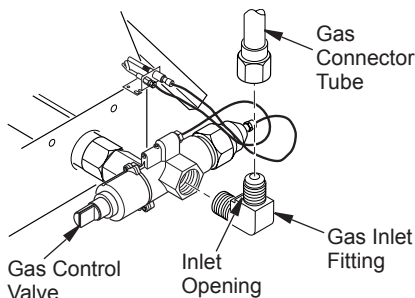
Installing Inlet Fitting and Gas Connector Tube
